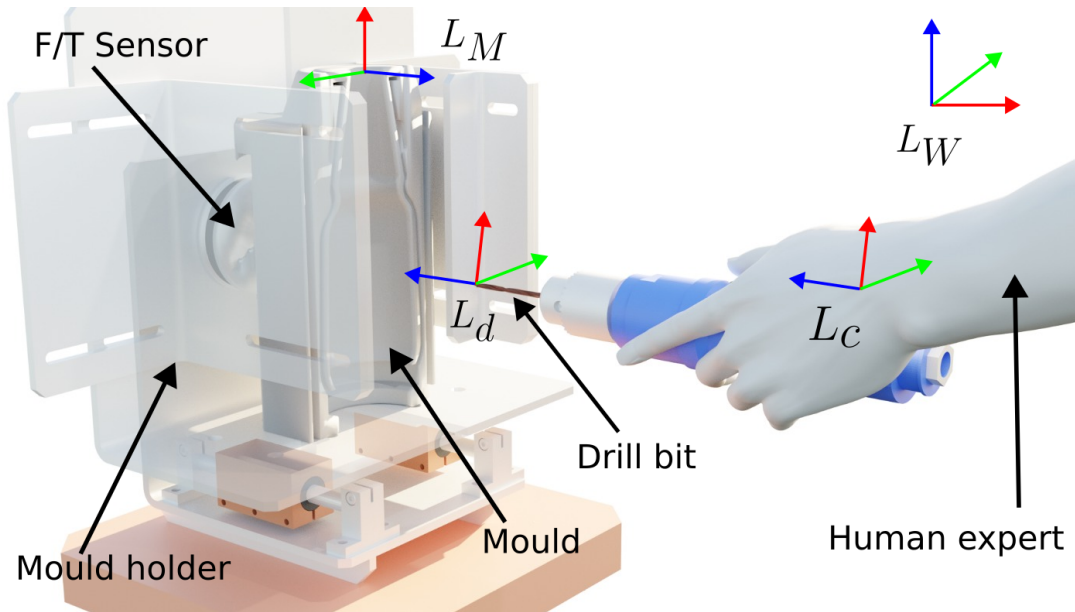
The mould holder’s mechanical setup accommodates moulds of various sizes and weights. It includes linear bearings that counterbalance the mould’s weight, ensuring smooth movement during drilling. After localizing the mould’s frame L_M within the world frame L_W , and calibrating the tool’s frame L_d in carrier frame L_C , the drill was continuously tracked to record the expert’s motion.
